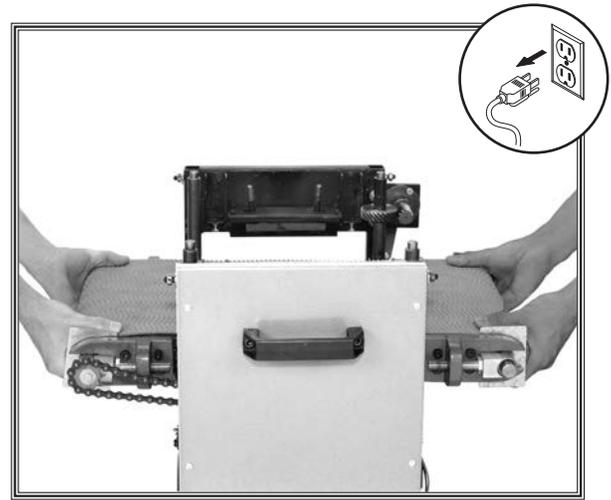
Conveyor belt loosened at the front adjustment bolts.
